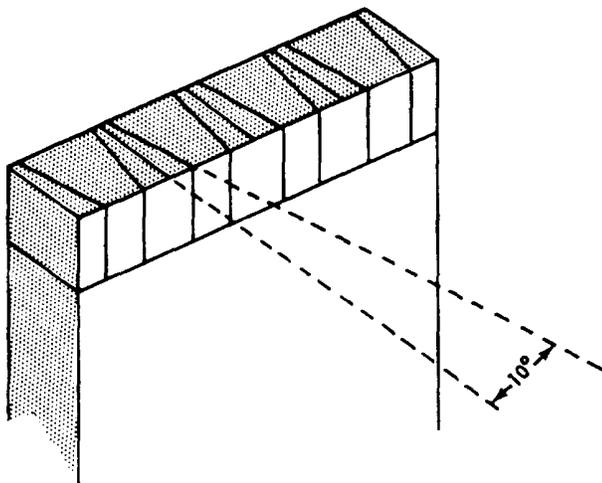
Laying out a pin member for a through-multiple-dovetail joint.
